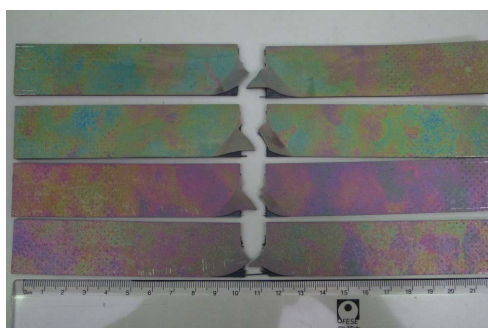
The failure cross-sections of specimens due to high load fatigue
